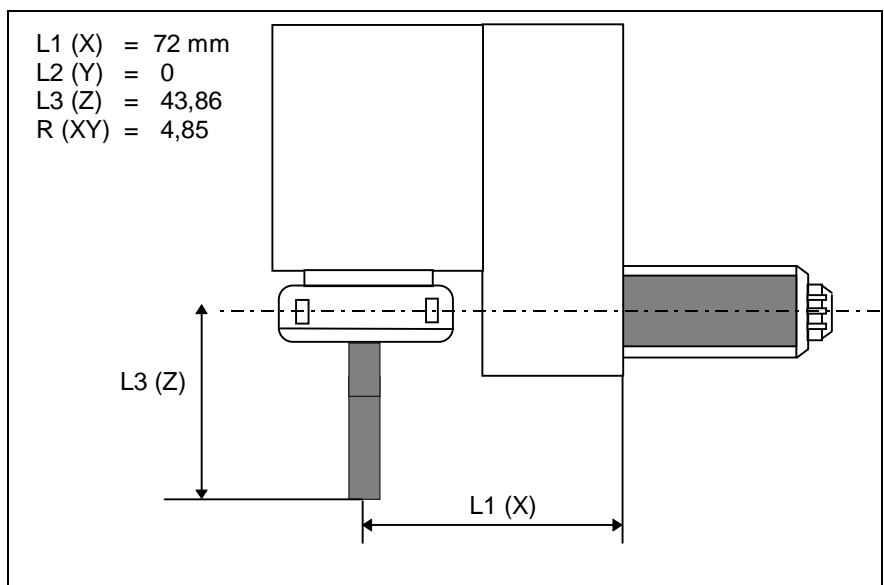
Driven tool: Angle head with BNF D 9.7
